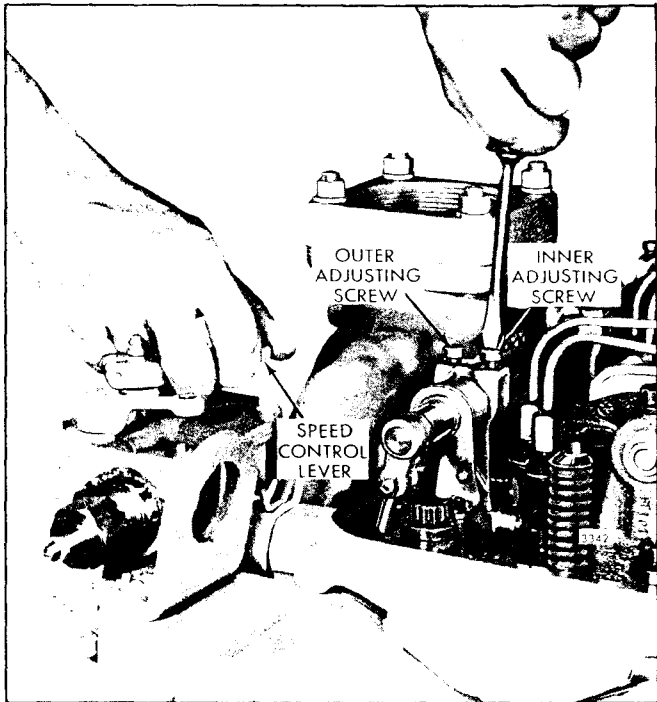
Positioning the Rear Injector Rack Control Lever
